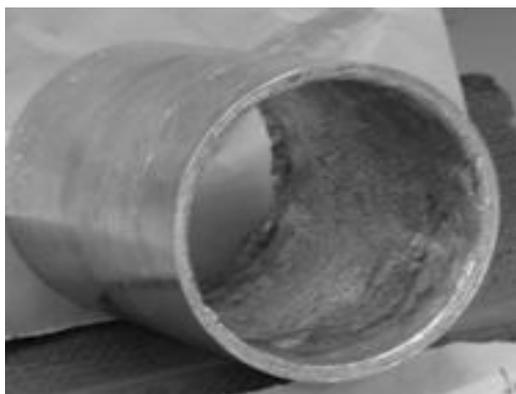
b Centrifugal Castings (size \varnothing 80, 120mm long) produced at 600 rpm
